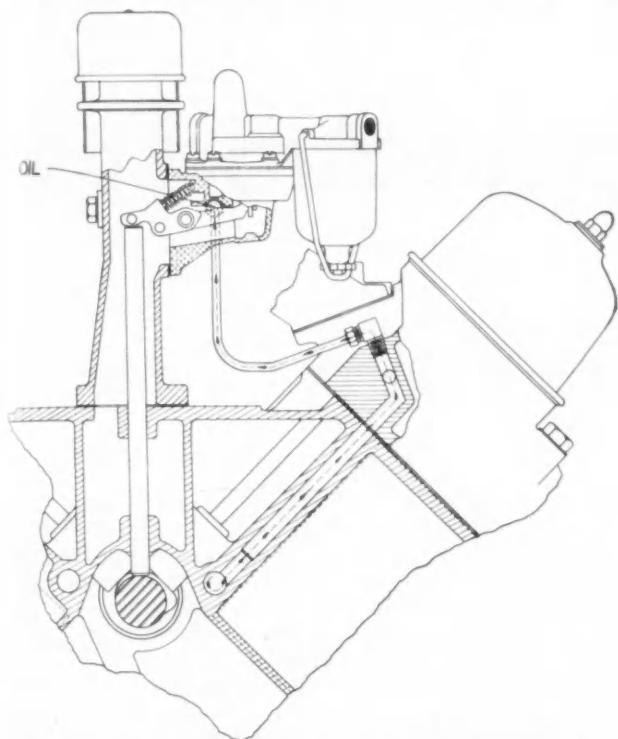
Fuel pump rocker arm assembly is lubricated by a direct connection to the main oil line
